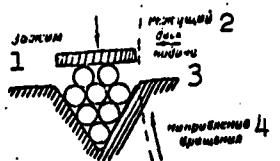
Cutting of workpieces in bundles. 1) Clamping; 2) cutting disk; 3) feed; 4) direction of rotation.
